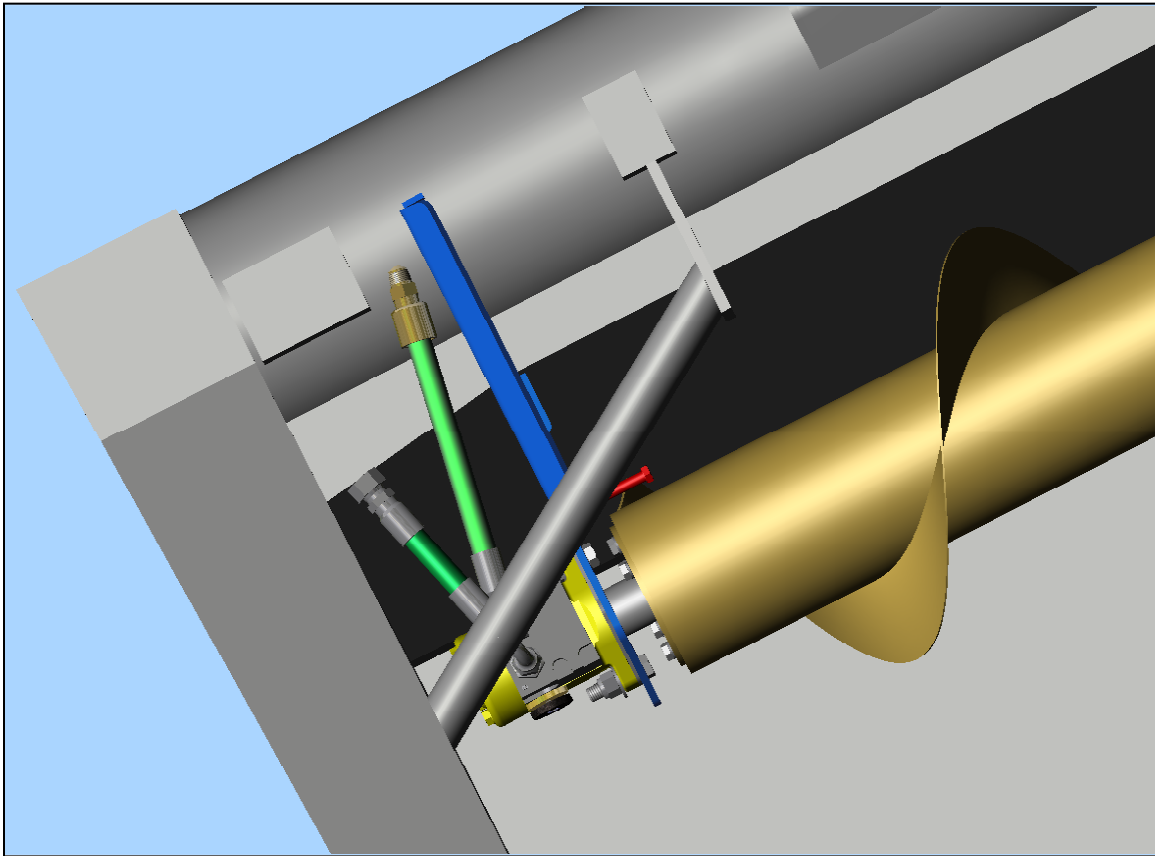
RIGHT HAND END MOUNT AND DRIVE (TOP VIEW)
